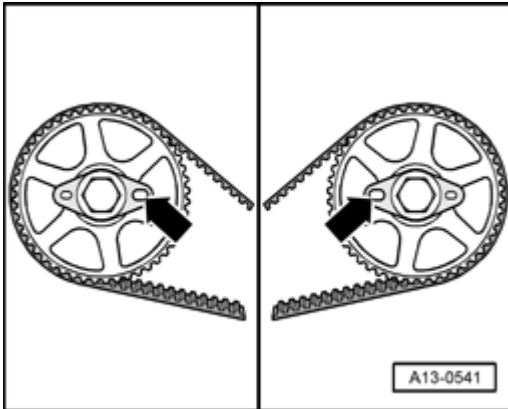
Identifying Large Holes On Securing Plates At Camshaft Gears Aligns On Inside
